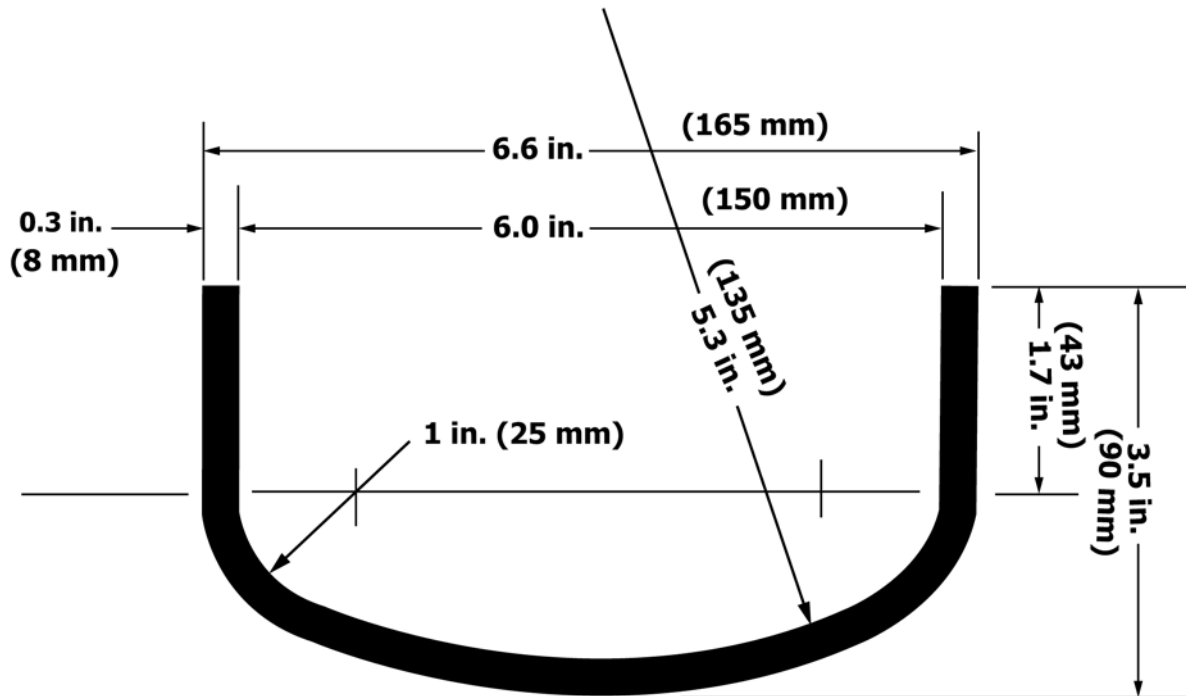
Standard 6 in. (150 mm) Weld Cap
